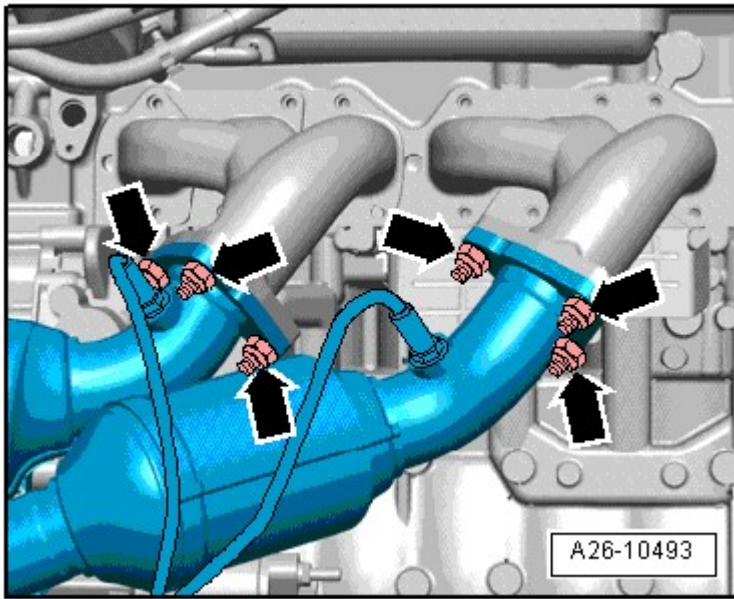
Identifying Exhaust Pipe With Catalytic Converter To Exhaust Manifold Nuts -Arrows-
